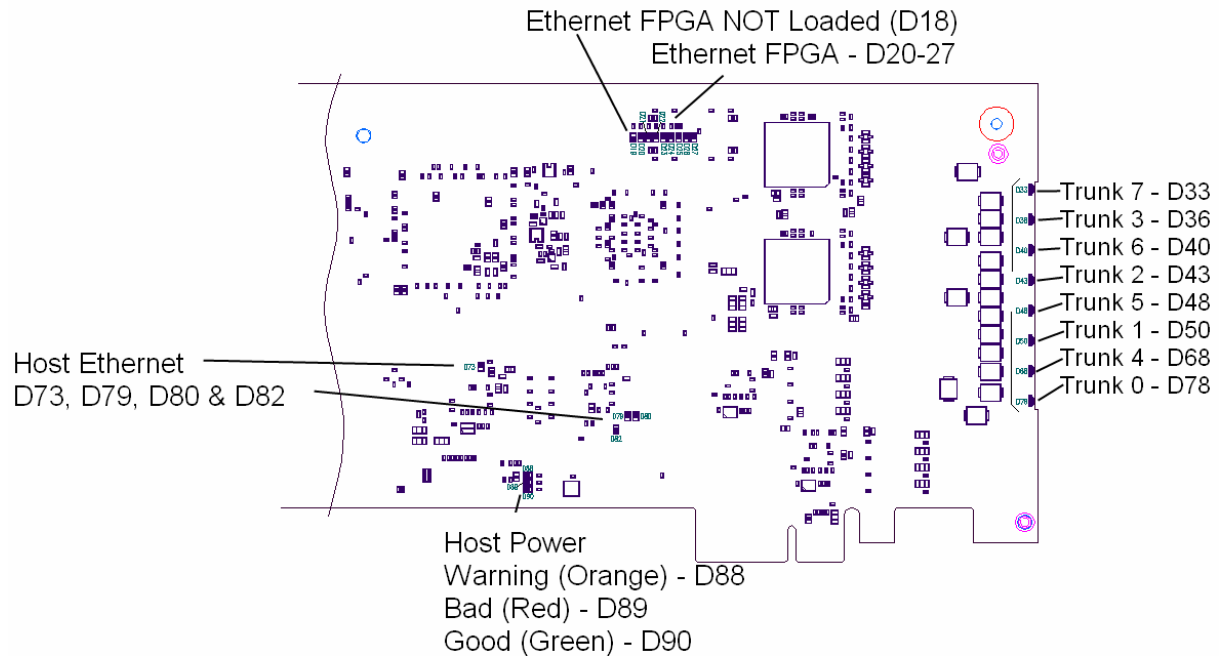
Prosody X PCI Express R3 Bottom right-hand side LEDs
